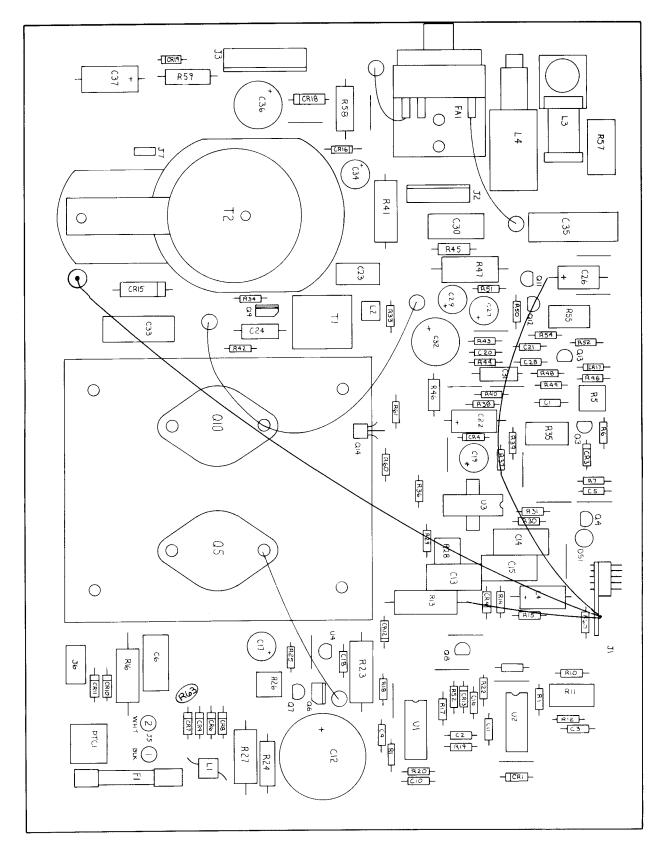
Deflection PCB Assembly 19-Inch Display A201022-01 C 25-Inch Display A201022-02 A
